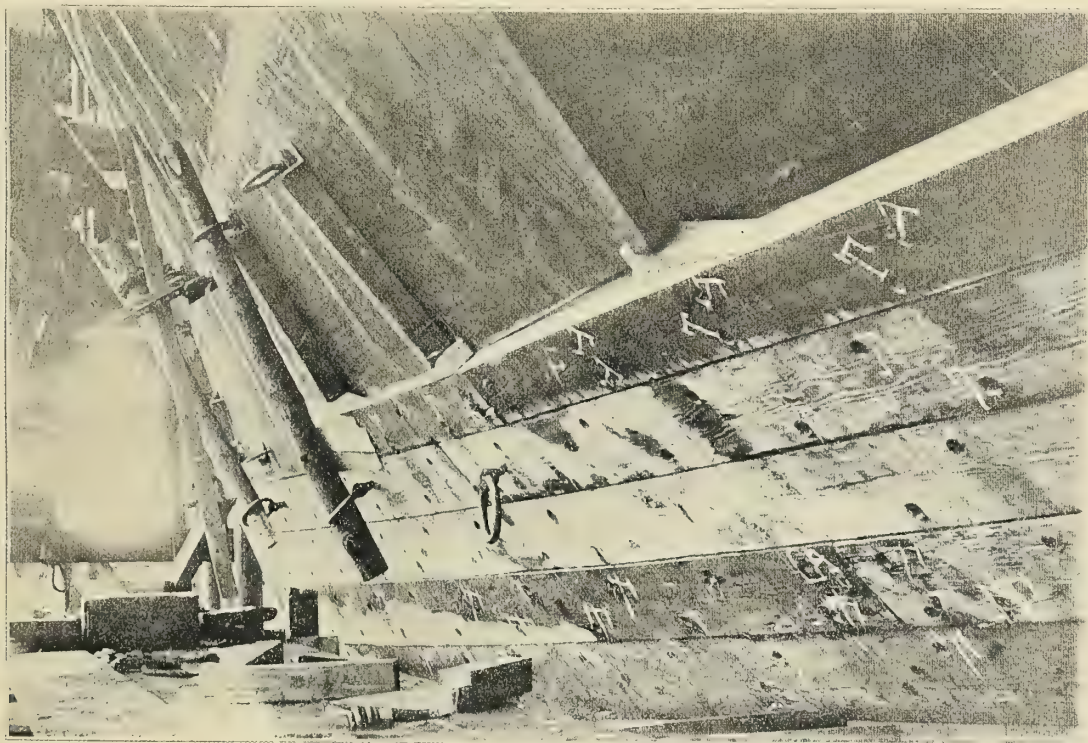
METHOD OF HOLDING PLANKING IN PLACE.
